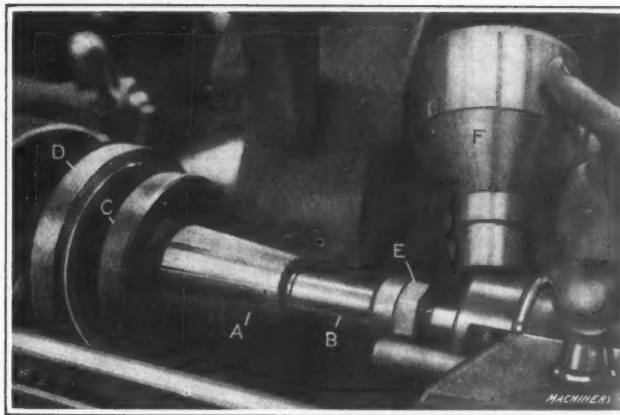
Method of holding Cream Separator Bowl Shell for grinding External Diameter
